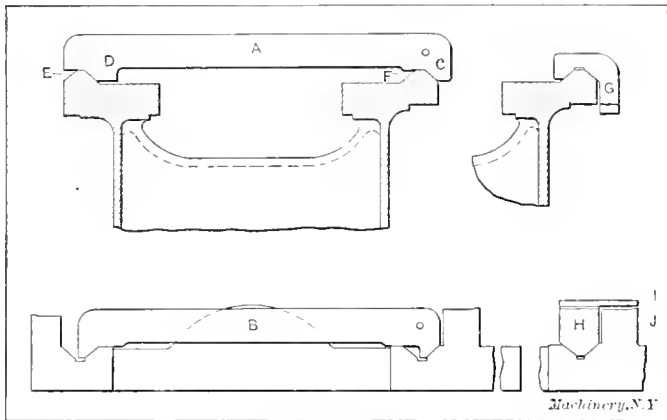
Gages for Testing the Planing of Lathe Bed and Carriage
